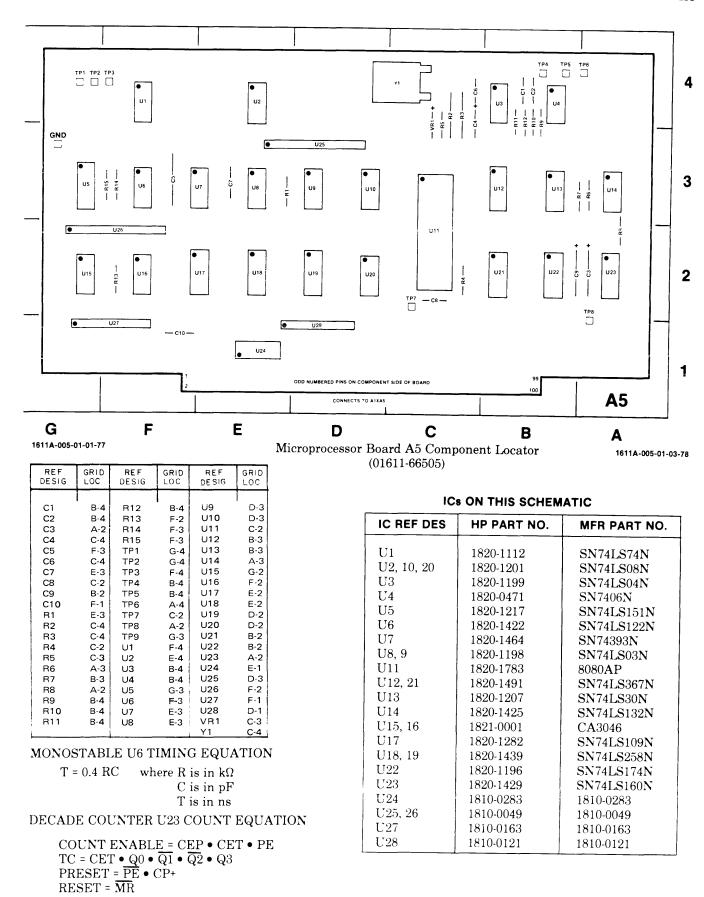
Service Sheet 5, Microprocessor and Key Board Scan Assembly A5 (Sheet 1 of 2)
